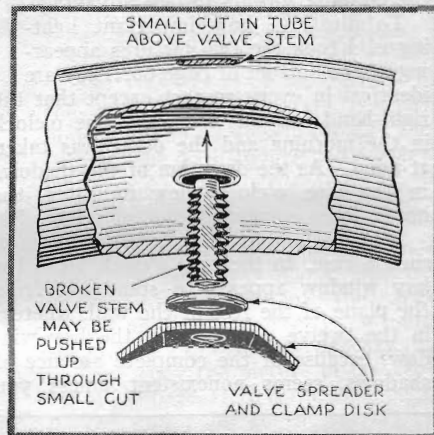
To put in a new tire tube valve stem, cut a slit in tube and insert stem through it
